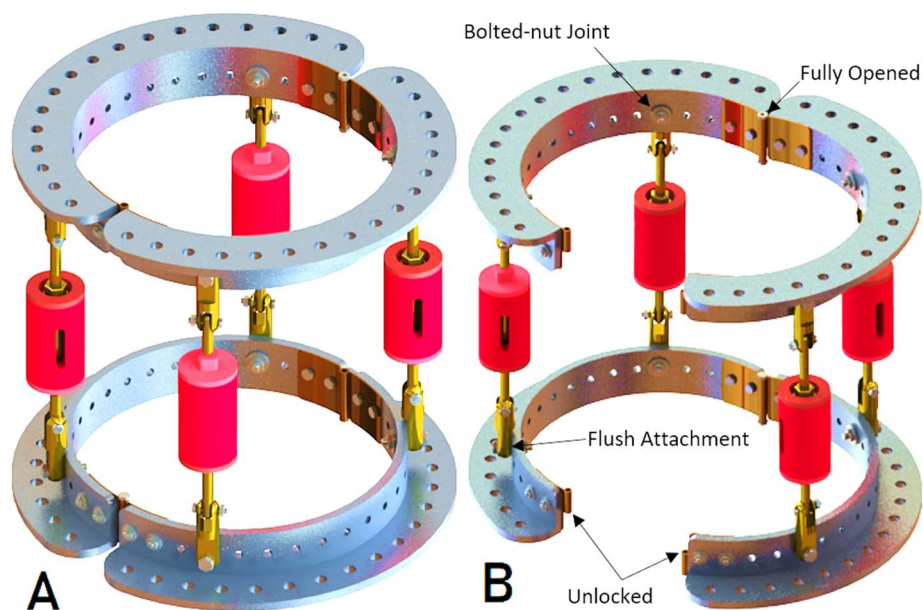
Concept 1 – (A) The full completed assembly of the Finite Lengthening External Ring Fixator (locked) (B) The system when unlocked and the fixator rings rotated about the hinge system, widens the mouth to expand to 60° fully opened.
